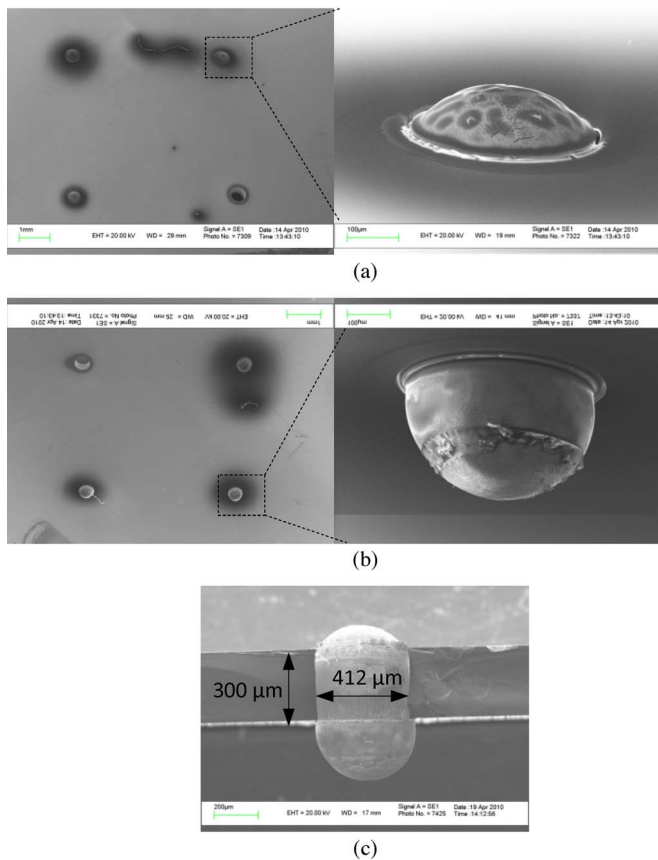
(a) Formed solder caps on the top of the device die. (b) Formed solder caps on the bottom of the device die. (c) Cleaved view of the solder. $AR \approx 0.7$.
